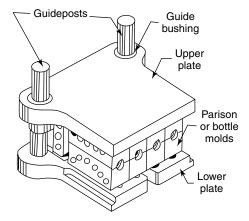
Die set for manufacturing position and alignment of injection blow-mold cavities.
